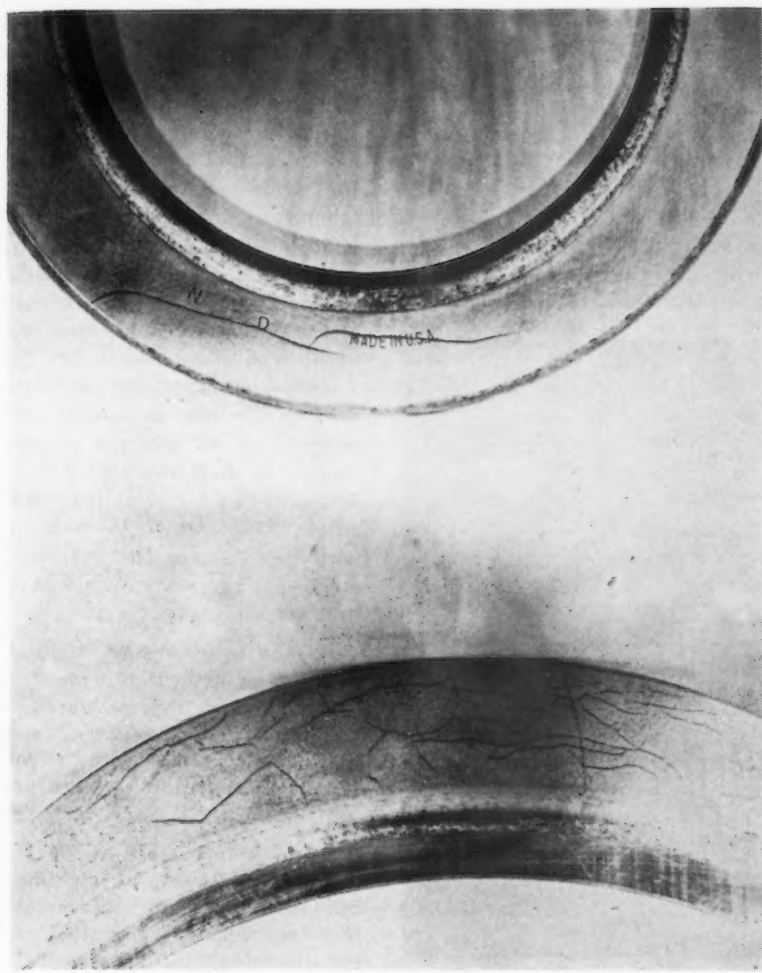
Magnaflux test shows otherwise invisible grinding cracks in ball bearing raceway.
